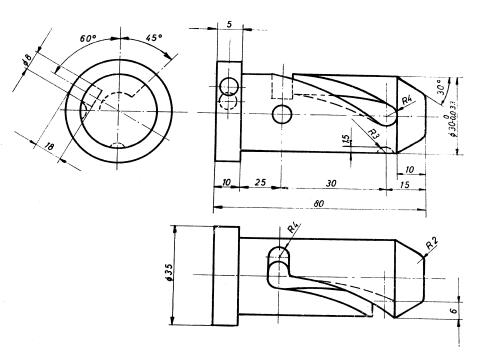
SPRING DEVICE DISCONNECTING BOLT -- LEFT Material: FLW 1452.4(3)
